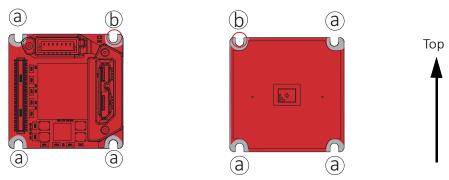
Mounting area of Alvium USB bare board cameras connector side (left); sensor side (right)
